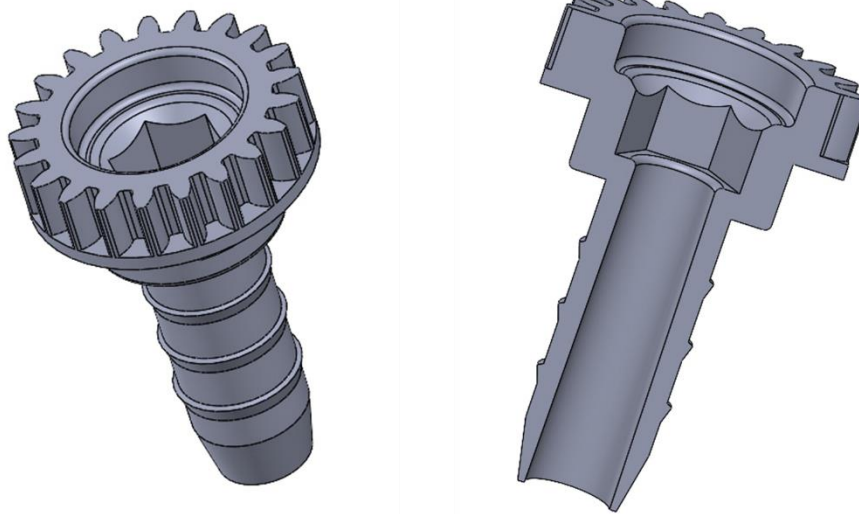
Second gear, co-axial with the spring and connected to it.
